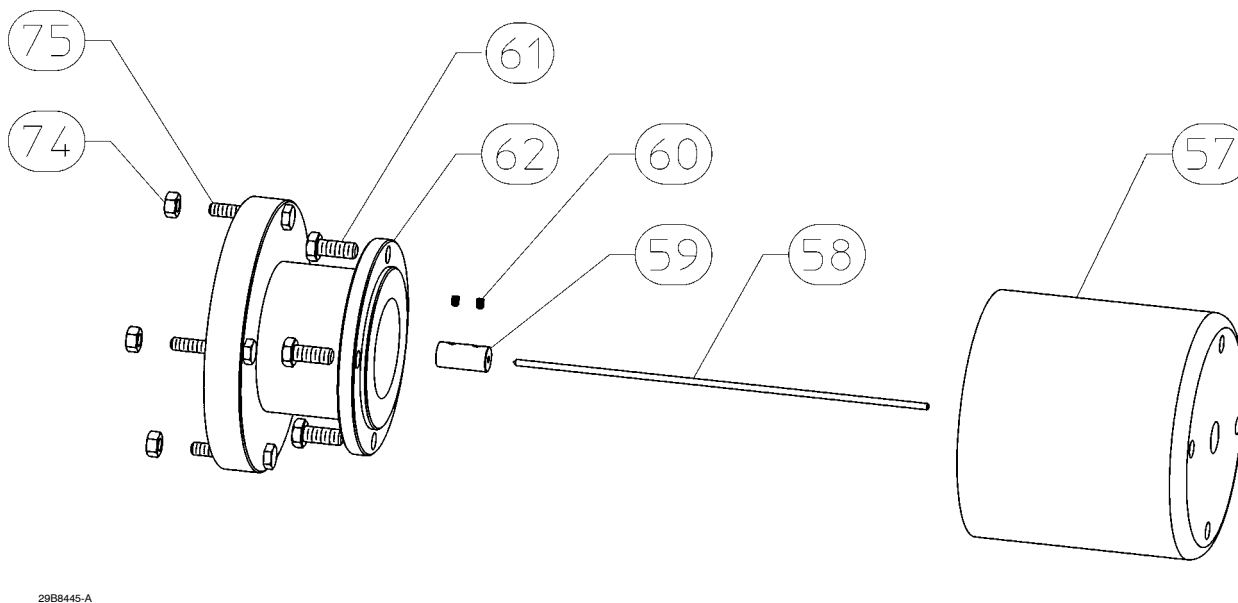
Mounting Kit for Masoneilan® 12200 and 12300 Sensor with Heat Insulator
